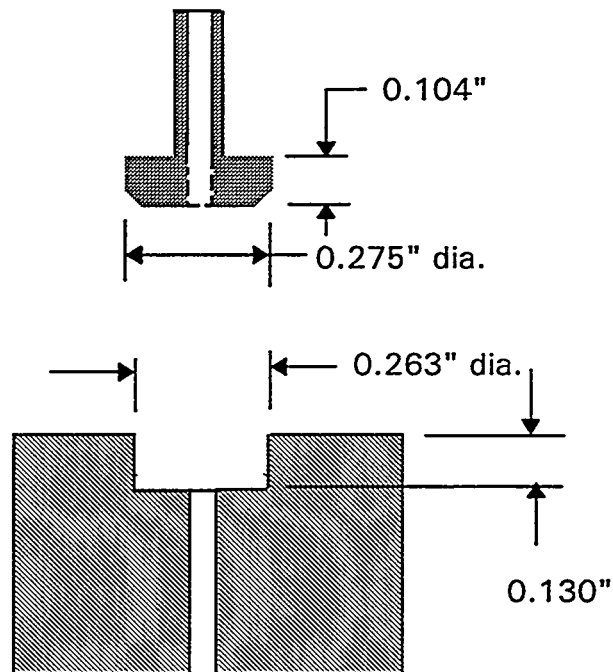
"Fill Stem A" to "Body A" weld configuration.
